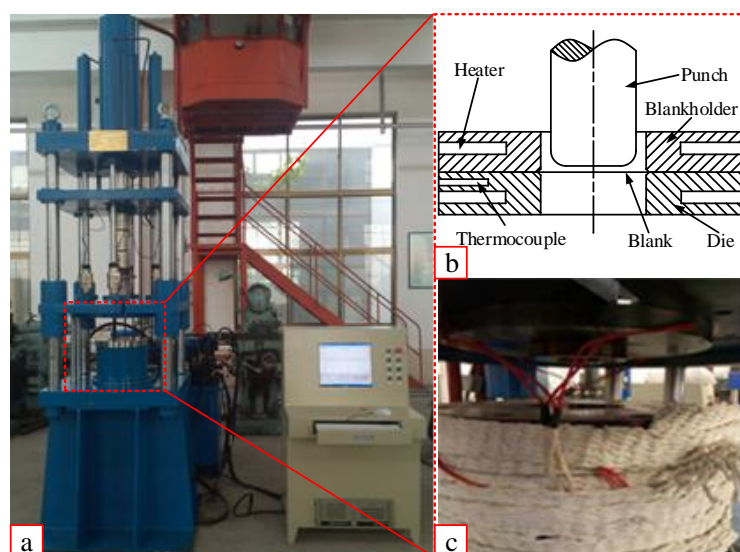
Equipment and die structures for hot stamping process of tube-shaped parts: (a) 100 T partitioned VBHF hydraulic machine, (b) die structure, (c) physical die.
